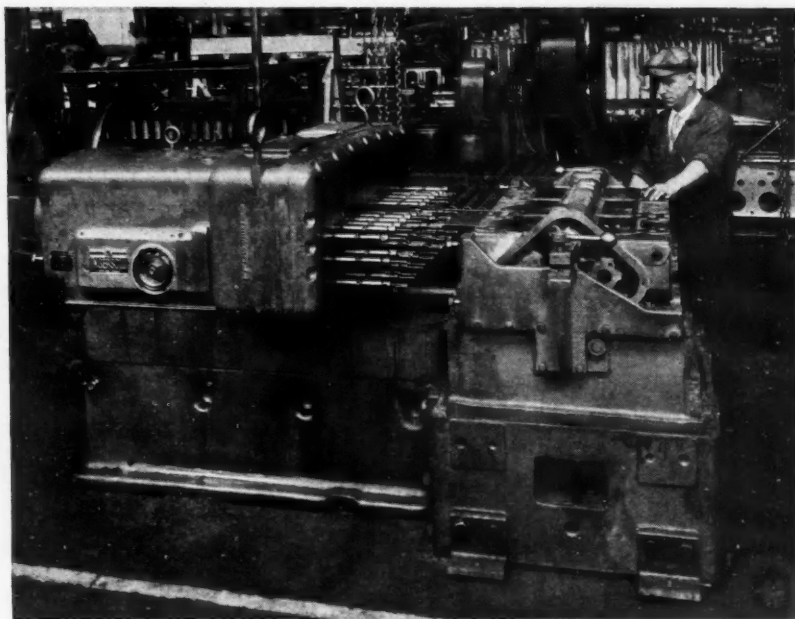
Here is a 59-spindle, one way drilling and tapping machine. Drills first, then when the block comes back later in the day, a tapping head (shown here) replaces the drilling cluster.
